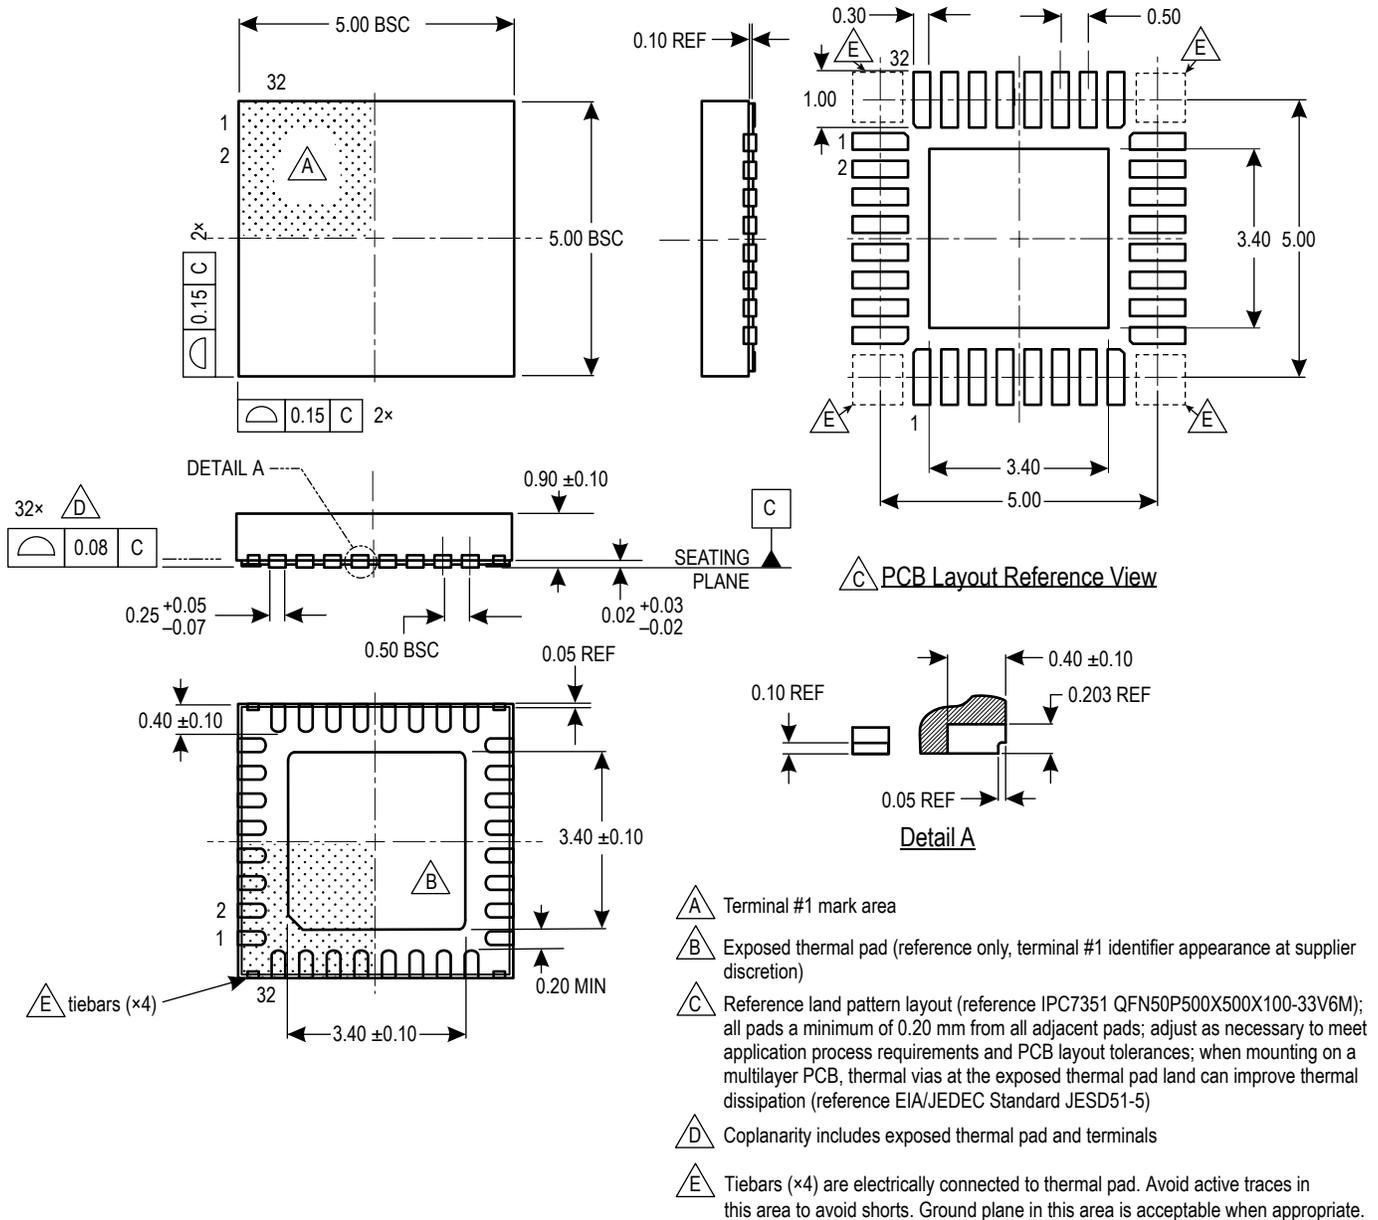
Package ET, 32-Pin QFN with Exposed Pad and Wettable Flank
